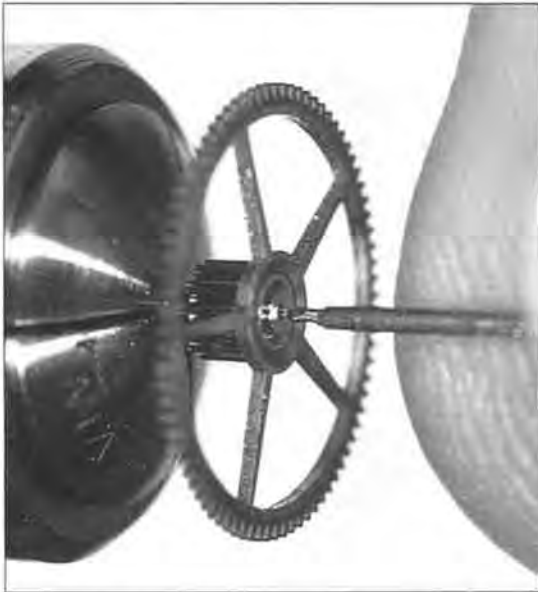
The hole for the new pivot was drilled with a carbide spade drill.
